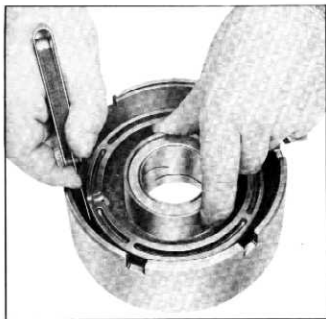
Checking Sealing of Clutch Piston Outer Seal
